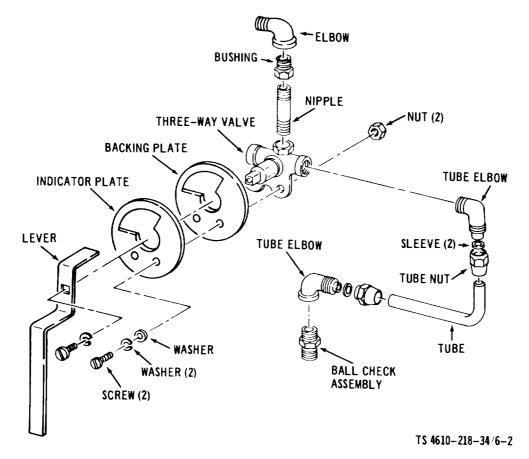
Diatomite Filter Air Release Valve, Three- Way Value, Disassembly and Reassembly
